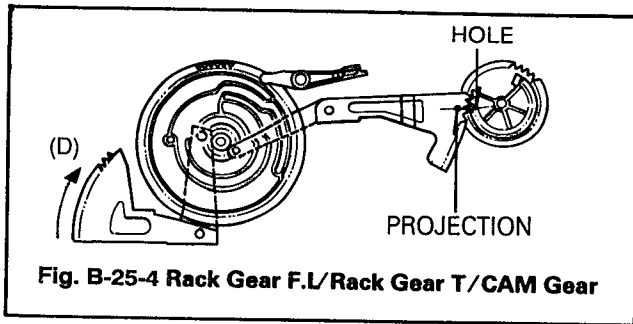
Rack Gear F.L./Rack Gear T/CAM Gear
